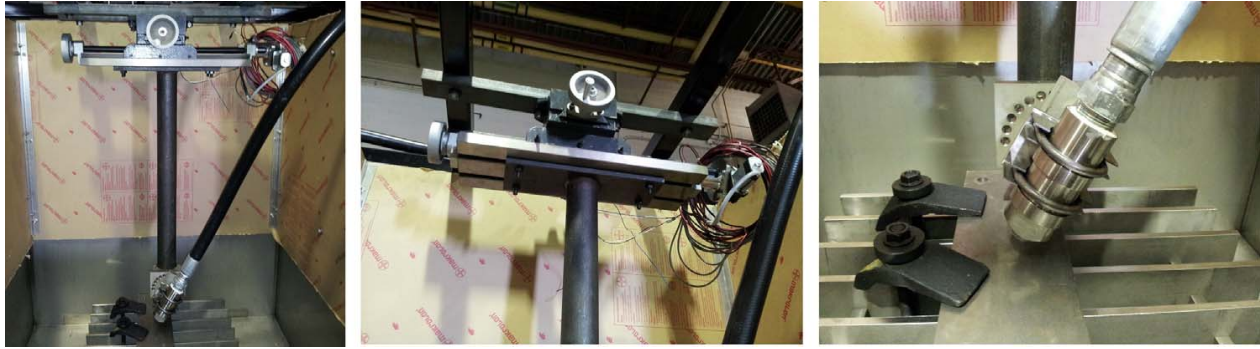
(left) final assembly of the tilting unit; (center) cross axes X-Y table actuated in one direction; (right) nozzle head attached to the tip of the tilting unit through parts with adjustable direction and position.
